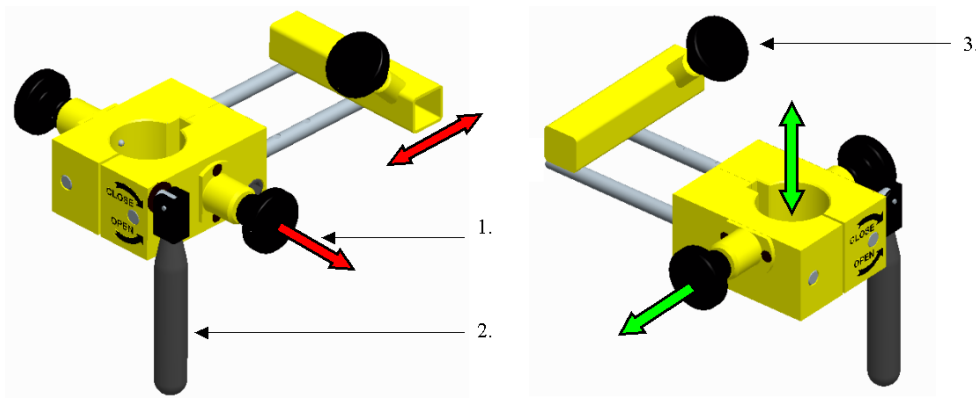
Structure of the Pos2 orthosis fixture. (Front and rear views)
